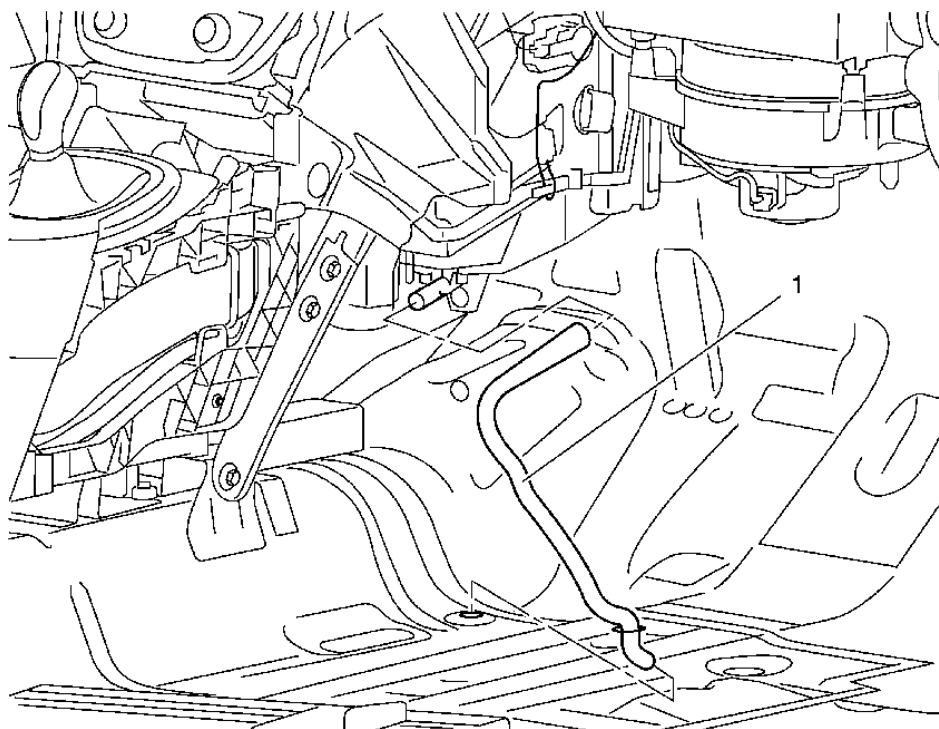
Air Conditioning Evaporator and Blower Module Drain Hose
